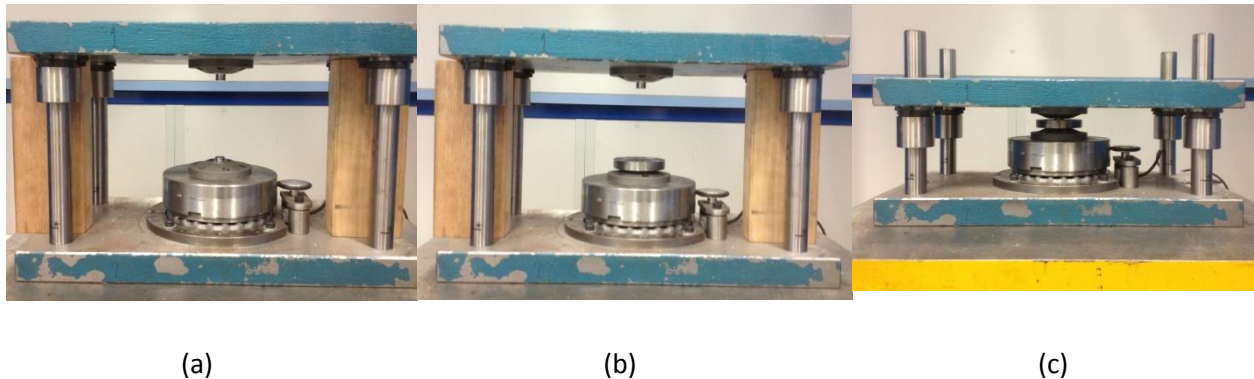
17 The CHPT test rig (a) before placing the sample and die on the test rig which shows the top and bottom punches (b) after the sample and die were placed on top of the lower punch and (c) after bringing the top punch in contact with the processing sample
